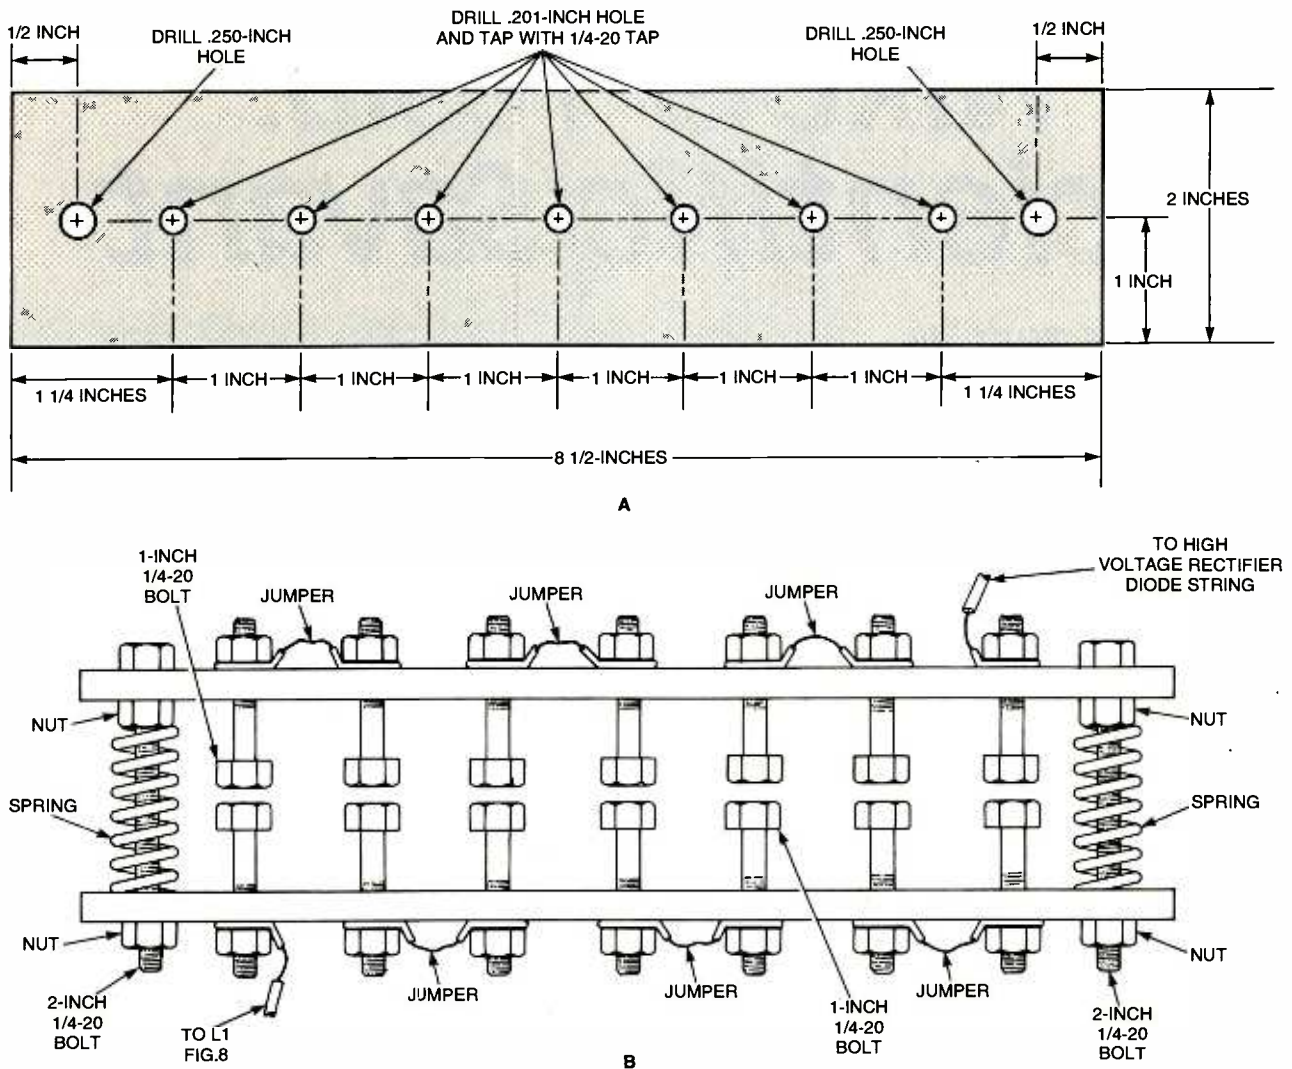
The spark gap for the Solid-State Tesla Coil is a multi-stage, spark-gap arrangement, comprised of two pieces of fiber board and 16 bolts and nuts. Details for fabricating the multi-stage spark gap are shown here.
